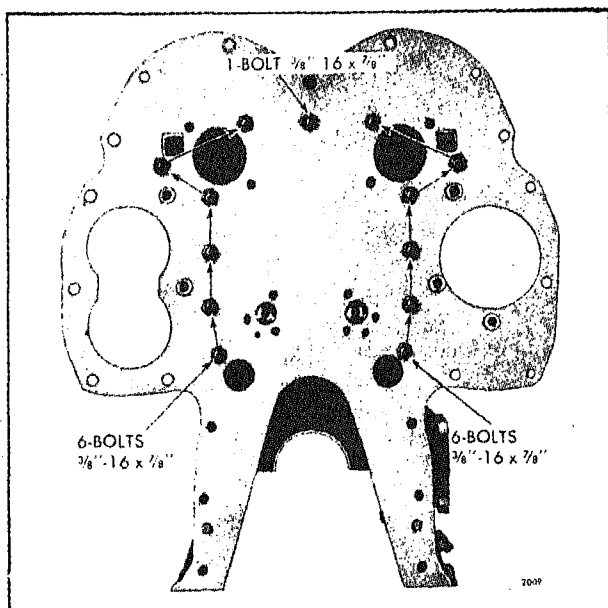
Cylinder Block Rear End Plate Mounting (In-Line Engine)
